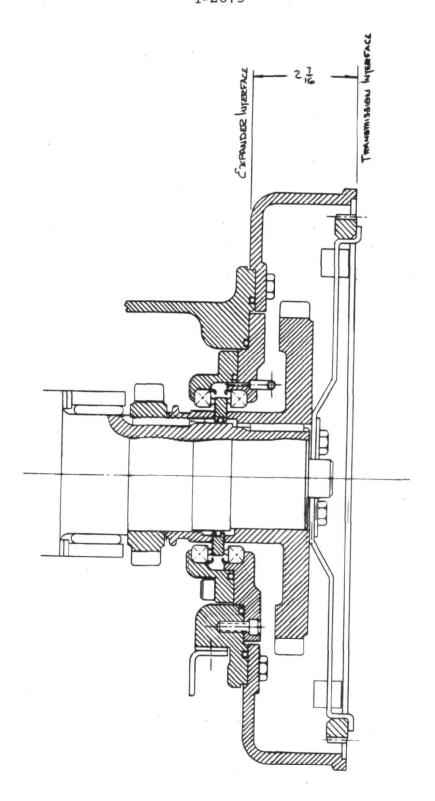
Expander Layout - Cross Section at Rear of Expander Showing Accessory Drive Bell Housing and Transmission Interface.
